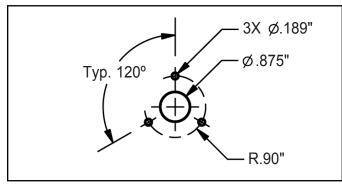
Drill pattern for mounting the bracket to a turnstile's cover
